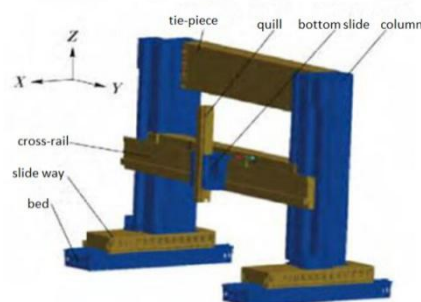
CNC heavy-duty gantry machine and global coordinates
